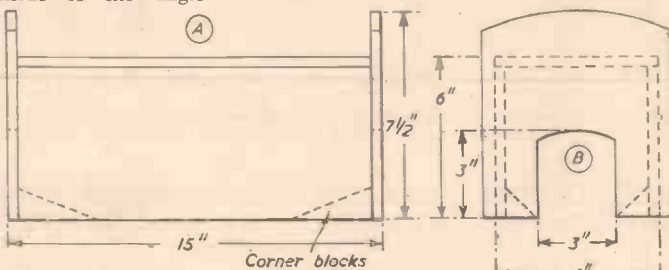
Details and dimensions for constructing the tunnel hazard.
